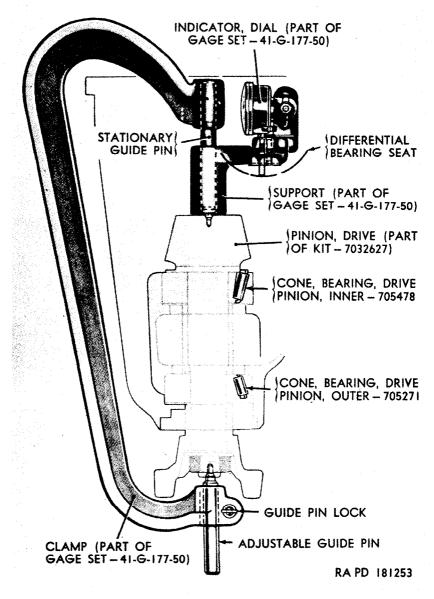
Seating drive pinion setting gage 41-G-177-50.
